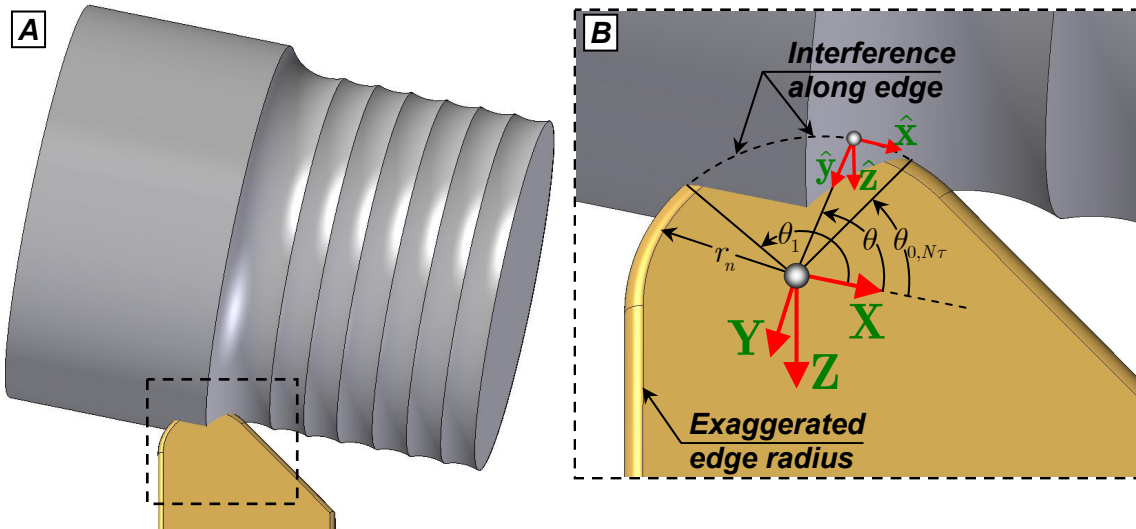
A schematic showing the region where plowing and flank interference occur along the tool edge. (A), A wide-field view of a partially machined workpiece; (B), a close-up view of the cutting zone.
